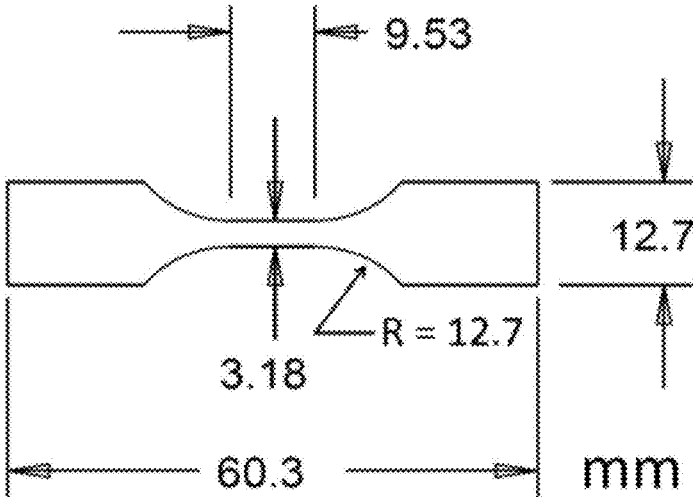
Schematic illustration of the ASTM D 638 Type V tensile specimen geometry; all dimensions are in millimeters.
